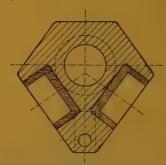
Meyfarth-Sécheron packing piece, shewing the socket and liner for the pushrod heads.
